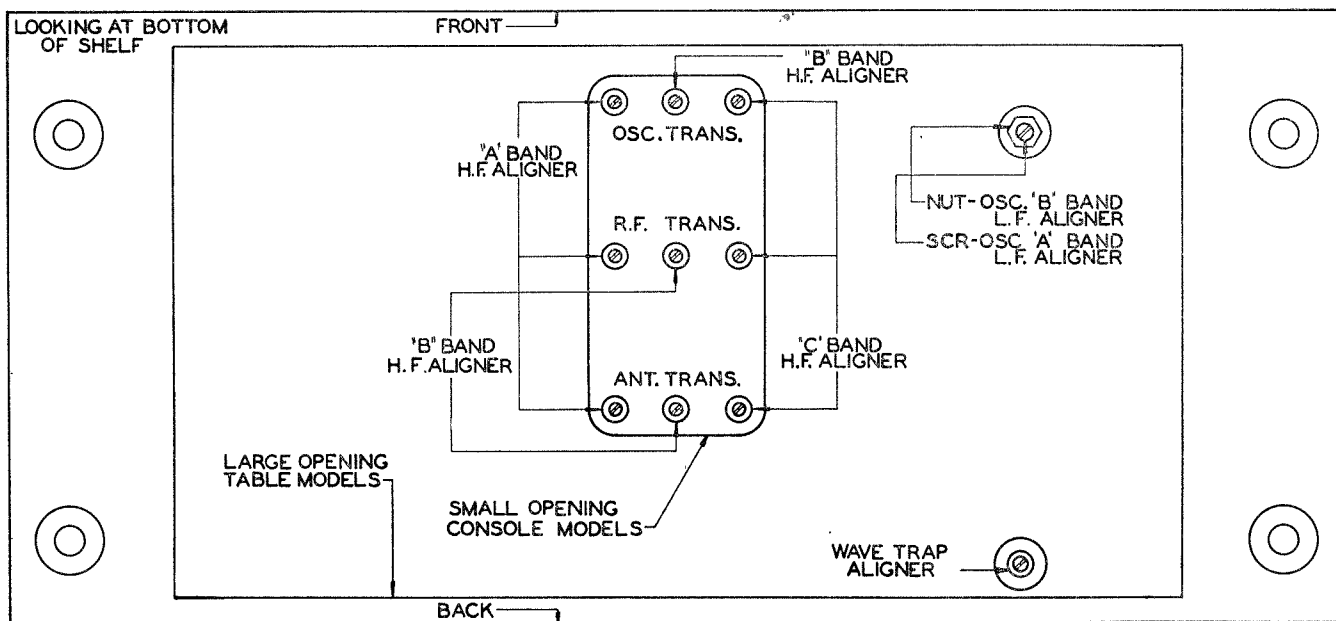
View Through Chassis Mounting Shelf Showing Adjusting Screws for R. F. Aligning Capacitors.
